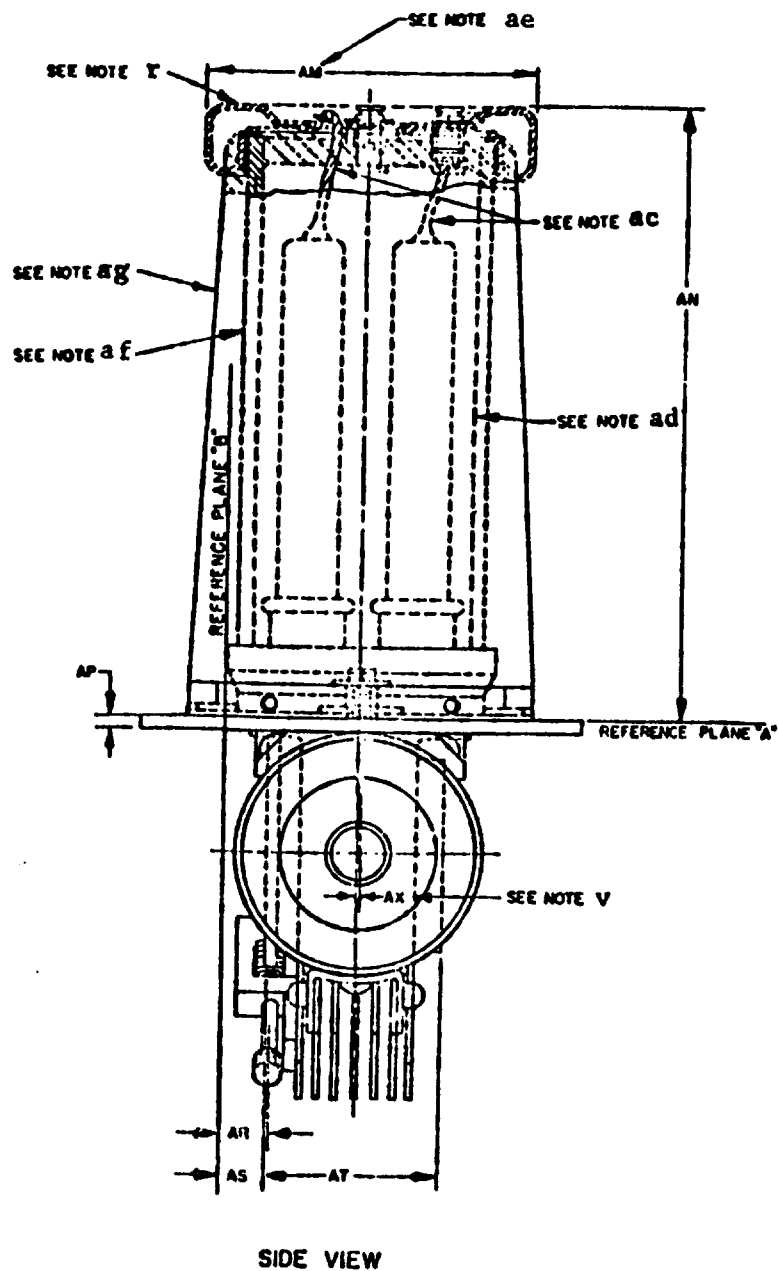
Outline drawing of electron tube types 5586 and 5657.
